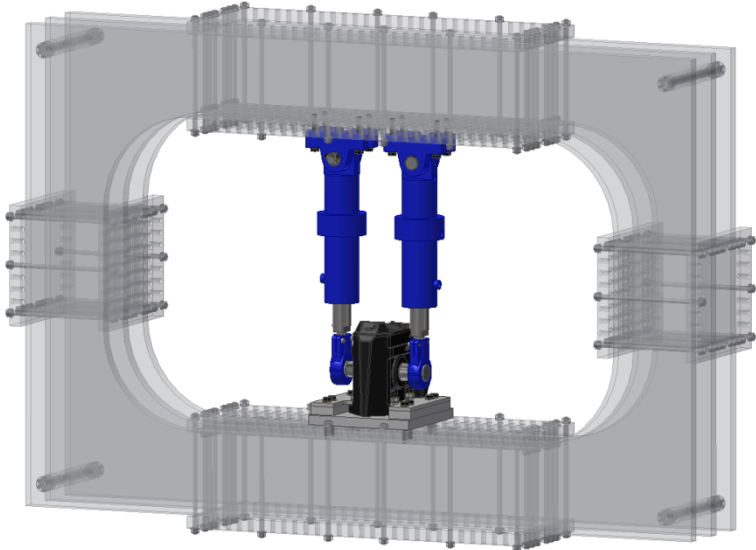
The fixation tool for the gearbox housing mounted in the test rig
